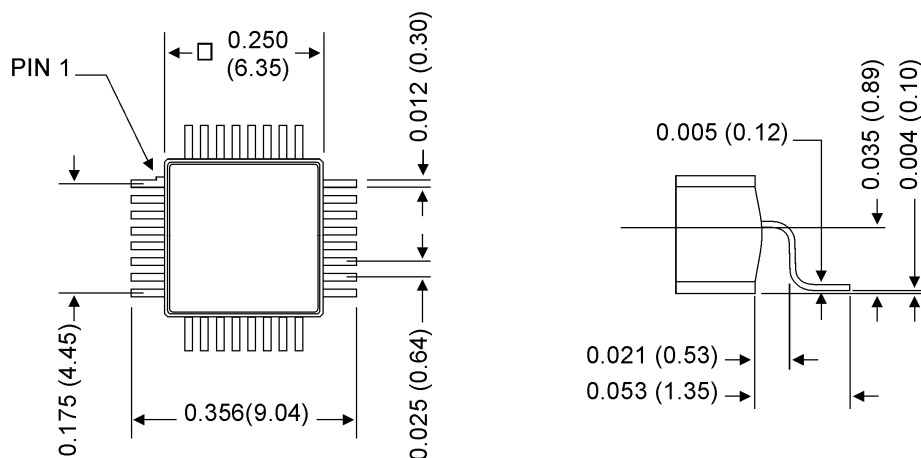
RDA012-QP package, dimensions shown in inches (mm).
